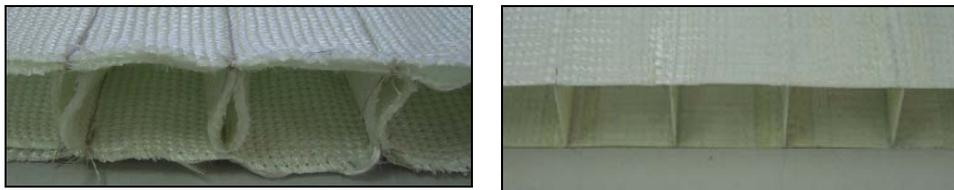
Spacer preform with uniform wall thickness and rectangular cross section made of multilayer knitted structure, textile (left) and composite (right)
